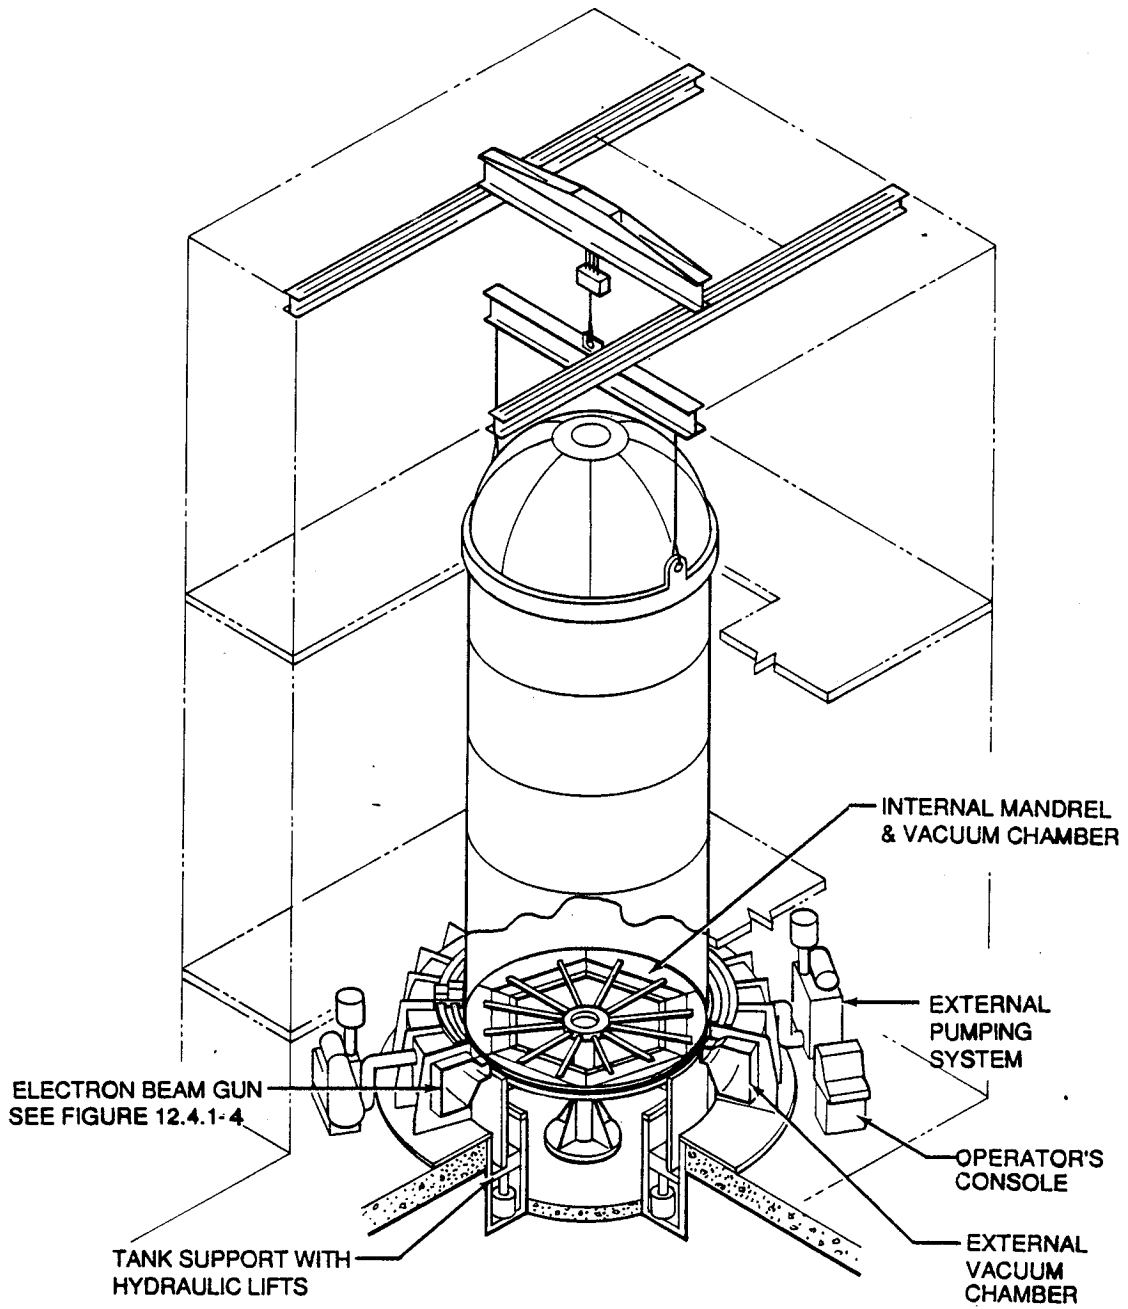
Pressure-Fed Tank Electron Beam Welding Cell
